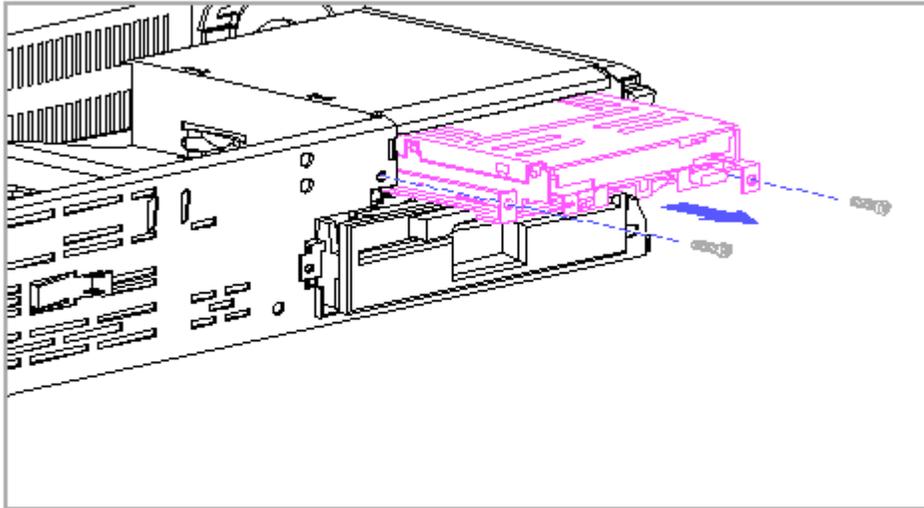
Removing the 3.5-Inch Diskette Drive
